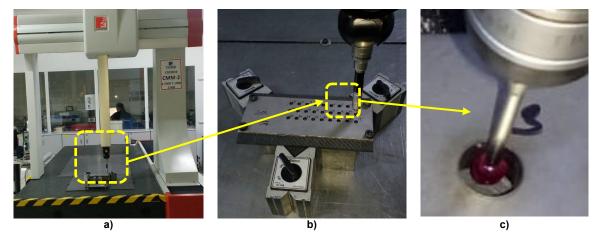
Dimensional accuracy and roundness error measurements: a) Overview of roundness error and dimensional accuracy measurements on the CMM machine, b) Fixture of the experimental workpiece on the CMM machine, c) Movements of the contact probe in the hole.
